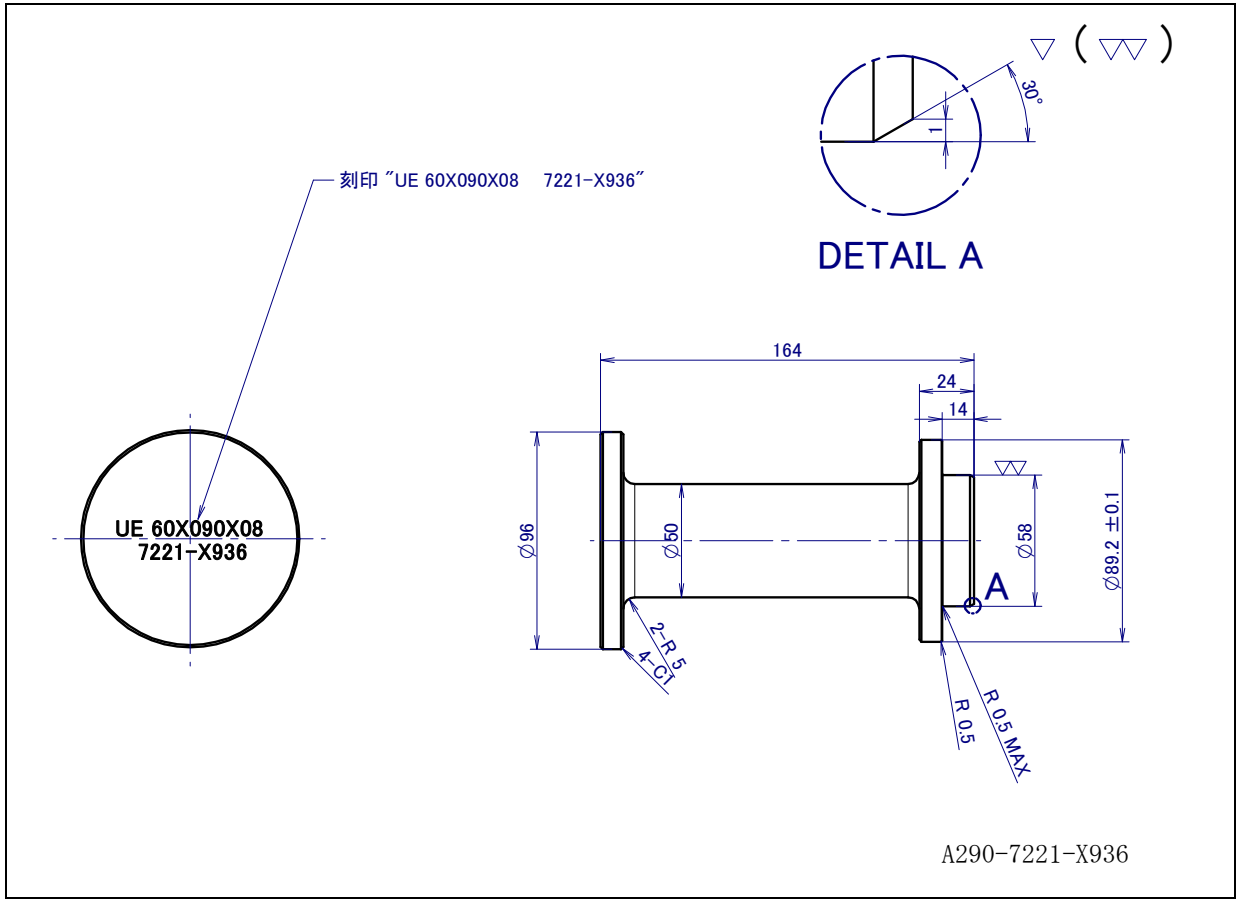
(c) Oil seal installation fixture for J1-axis reducer
